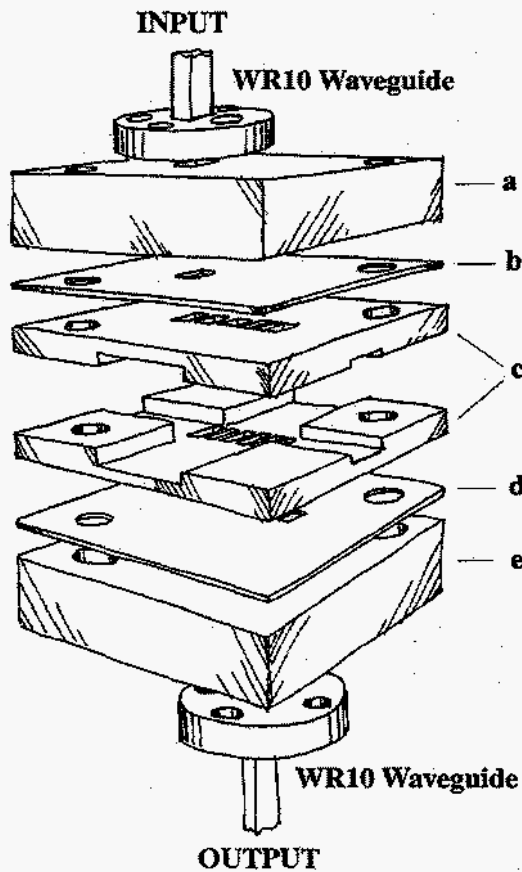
The mechanical design of the first prototype prior to the assembly.
